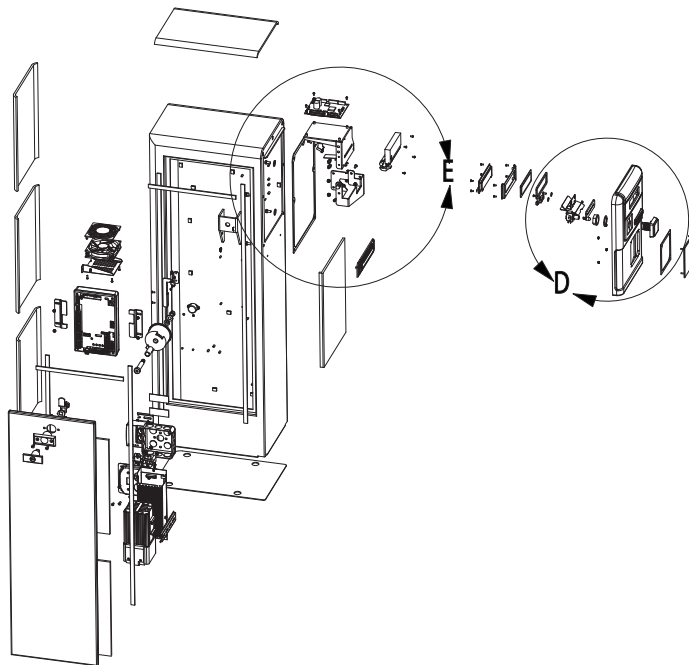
Barcode Ticket Dispenser (120VAC) Drawing, Detail D
